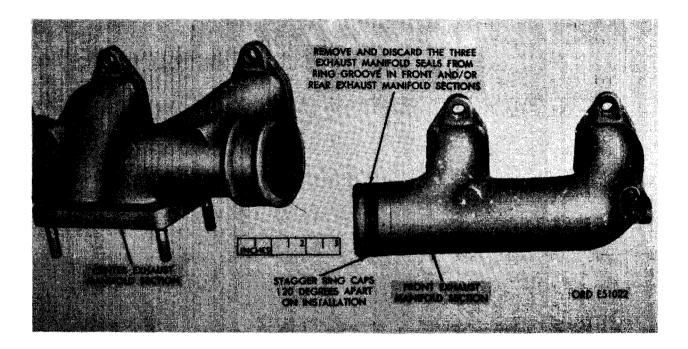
REMOVING OR INSTALLING EXHAUST MANIFOLD RING TYPE SEALS.
